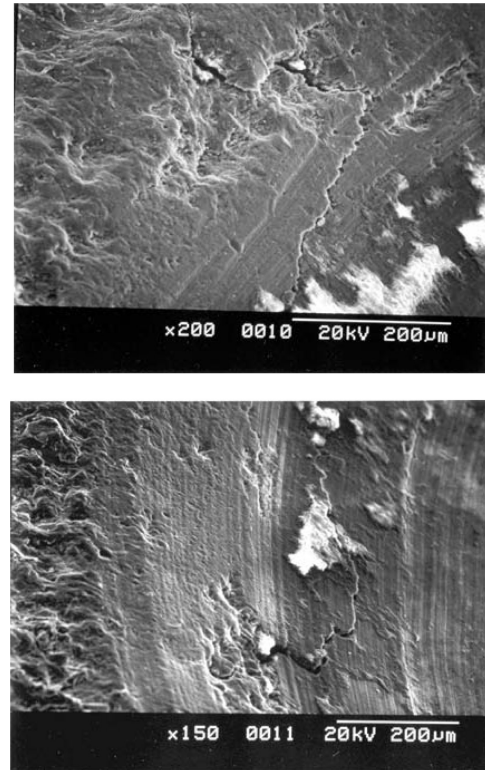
Examples of pitting with cracking in fastener holes.
